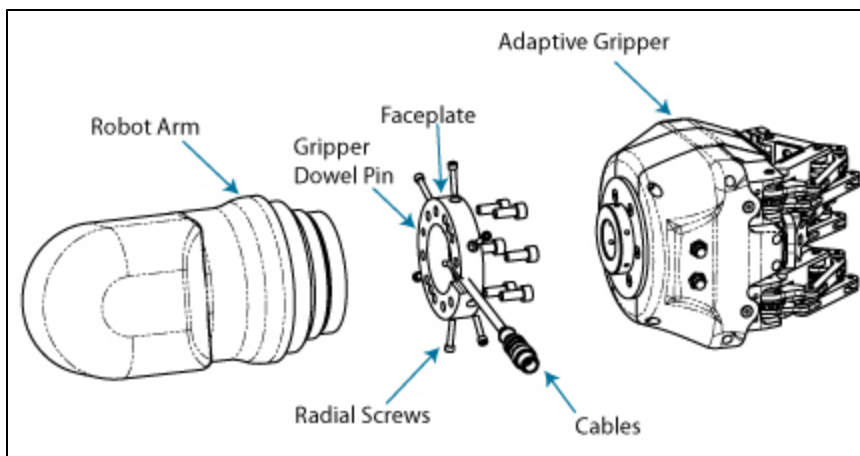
Attaching the Adaptive Gripper to a robot arm with the Faceplate.
